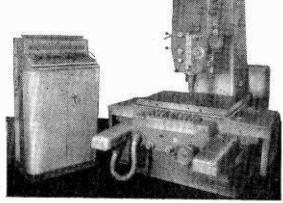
Electronic positioning equipment by Mullard applied to a Coventry Gauge and Tool jig boring machine. The row of signal lights are situated at the top of the control console.
